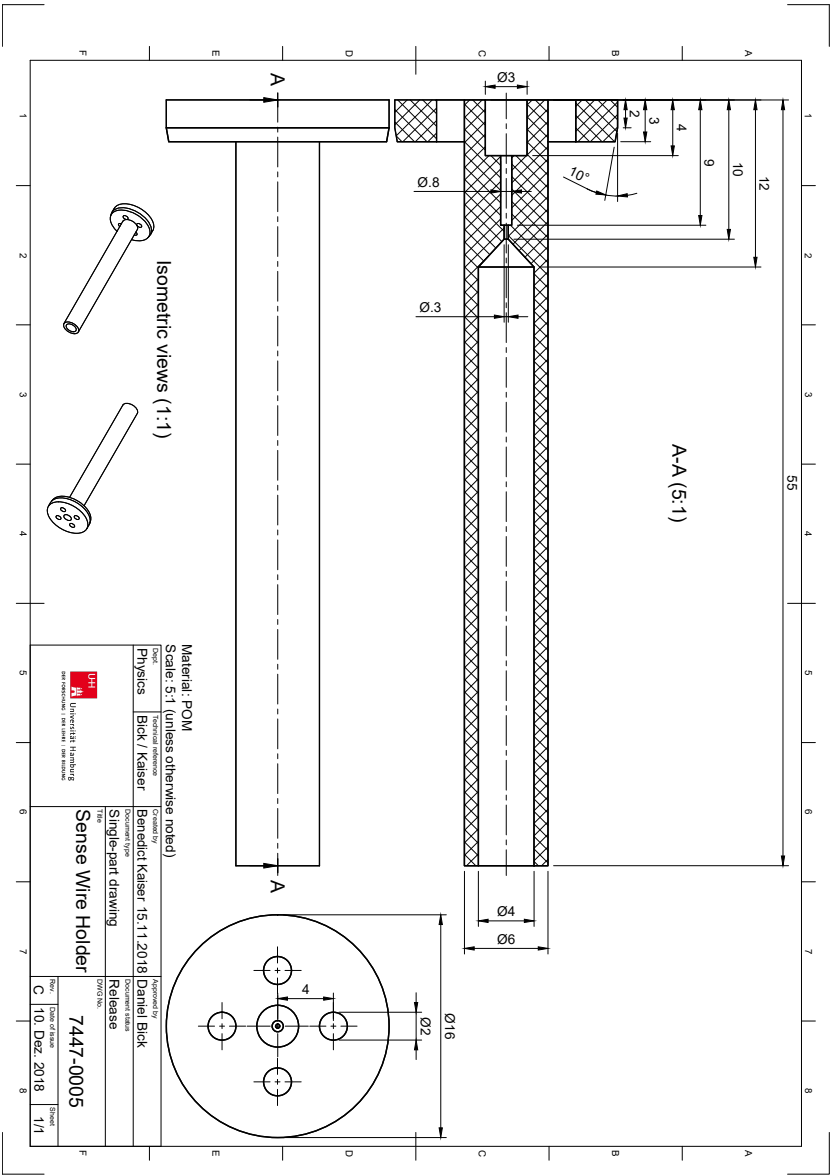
Technical drawing of the wire holder. The drawing is not to scale.
